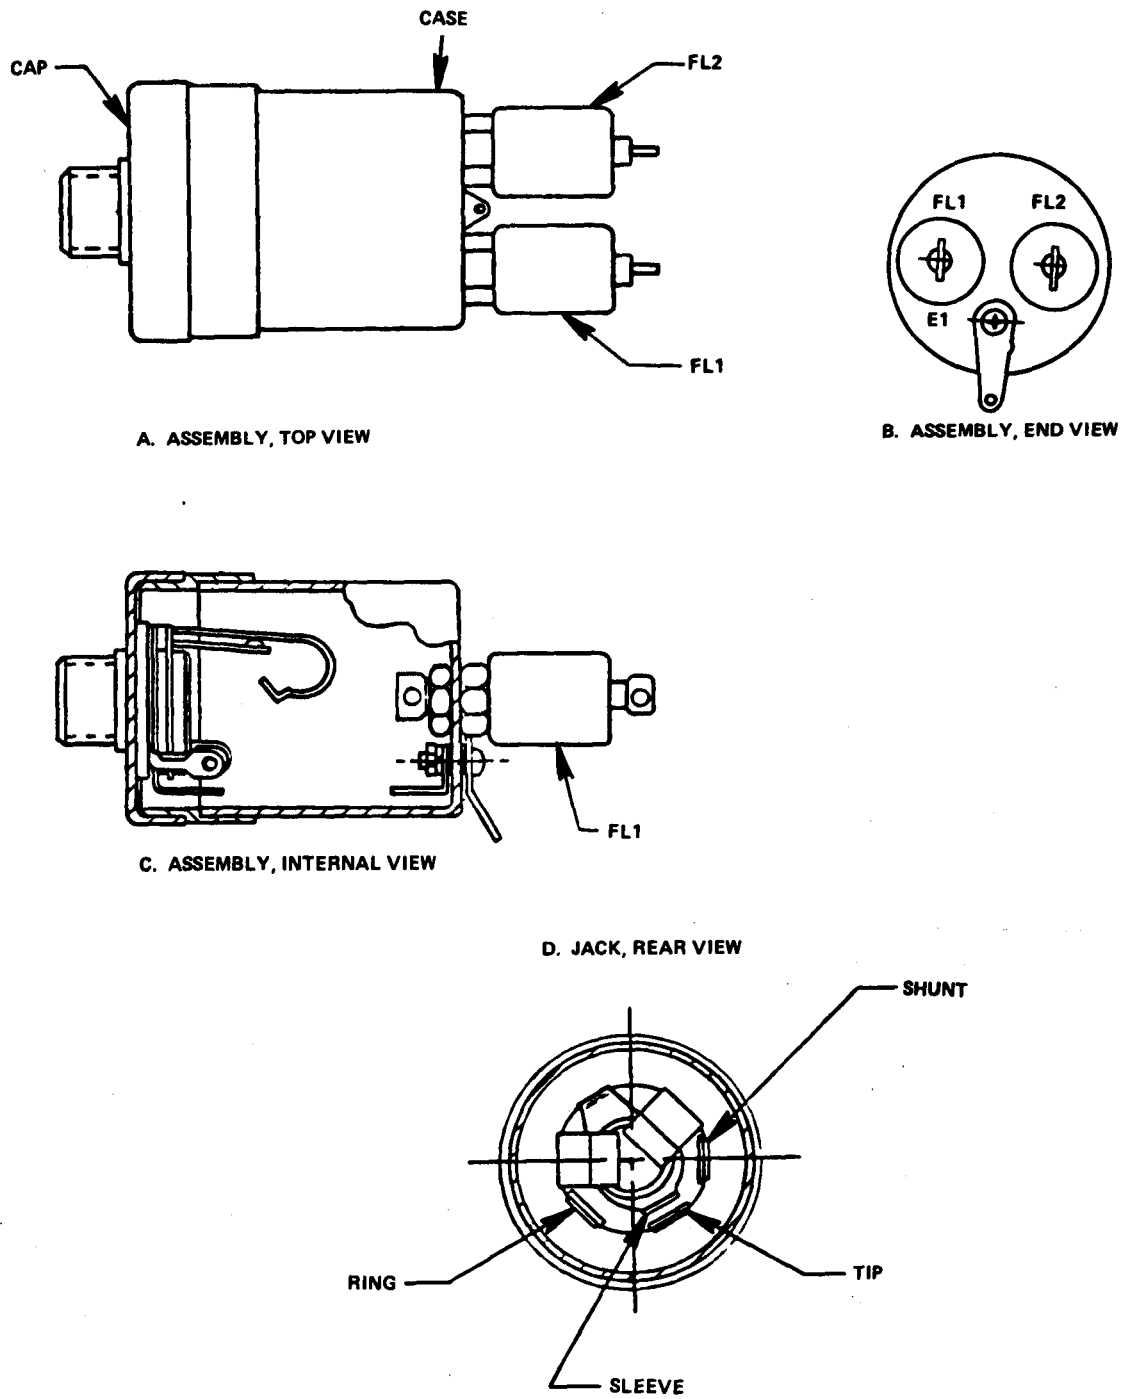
Filter Assembly-Jack (A2), Parts Identification
